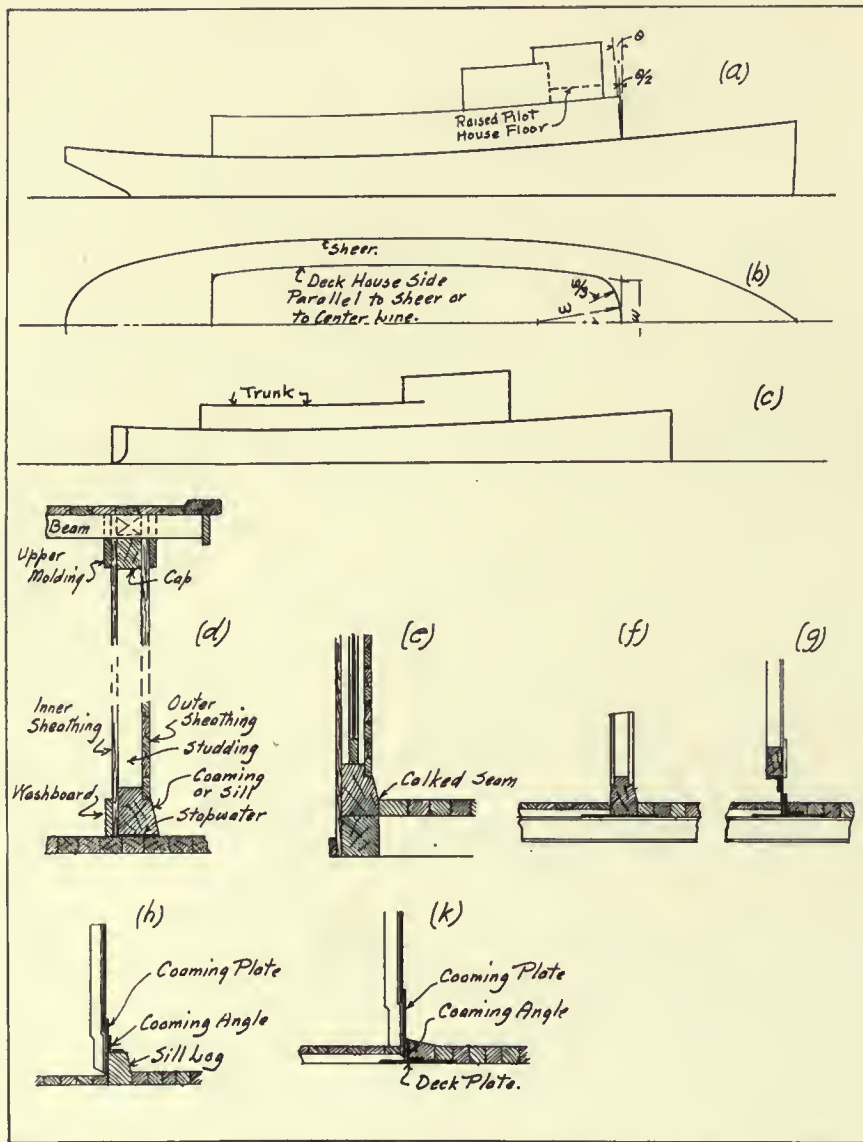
CONTOUR AND CONSTRUCTION OF WOODEN DECK HOUSES
